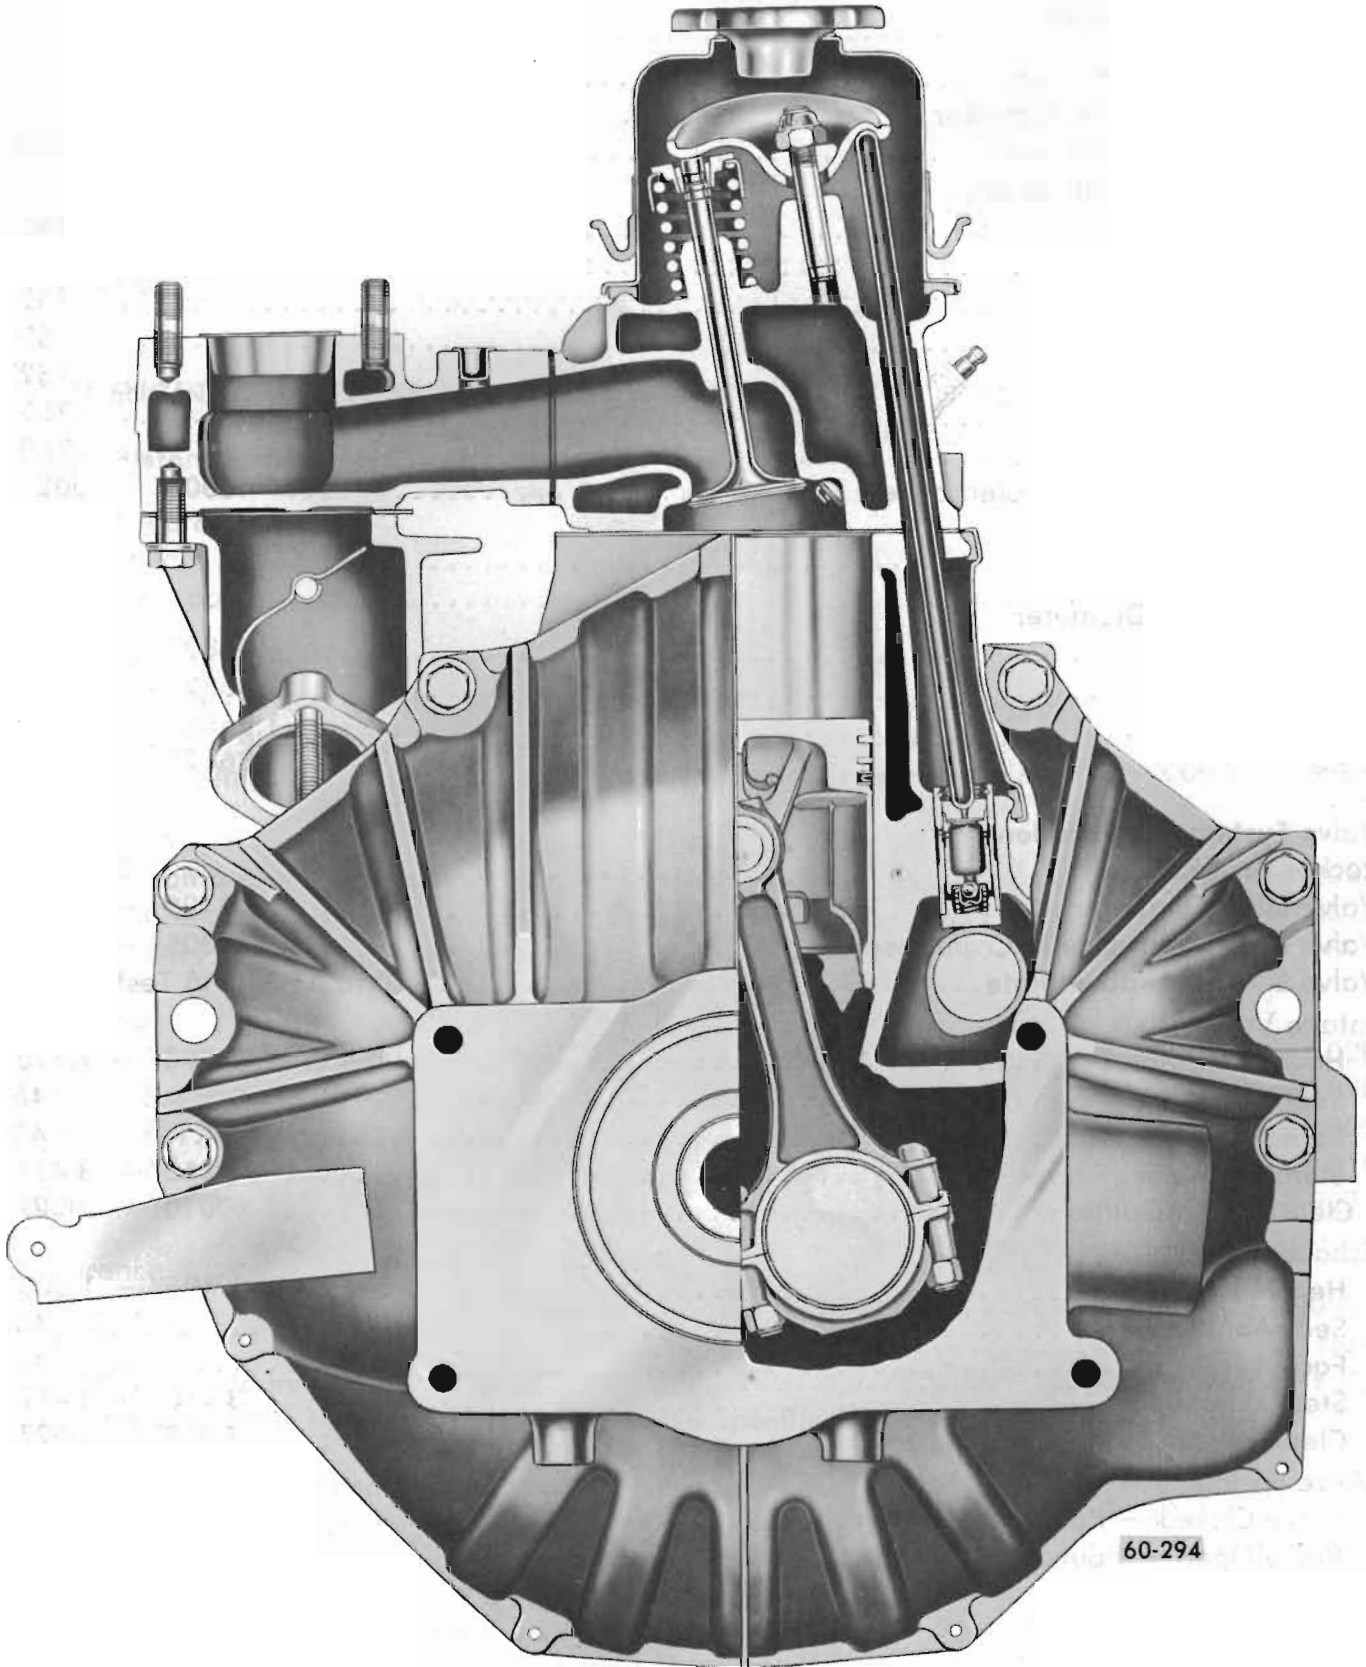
250 Cu. In. L-6 Engine Cross Section (Rear View)
